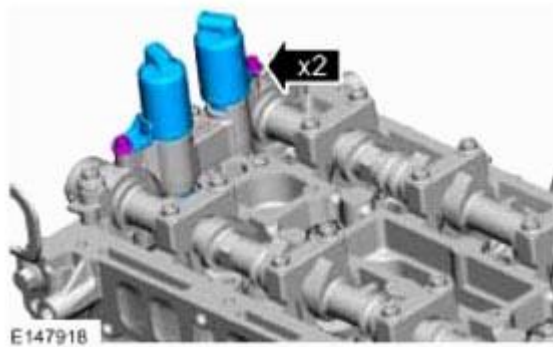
Locating VCT Oil Control Solenoids Bolts
